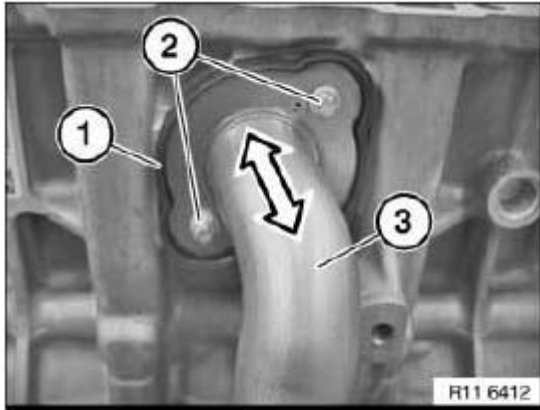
Identifying Water Pipe Mounting Screws And Seal
